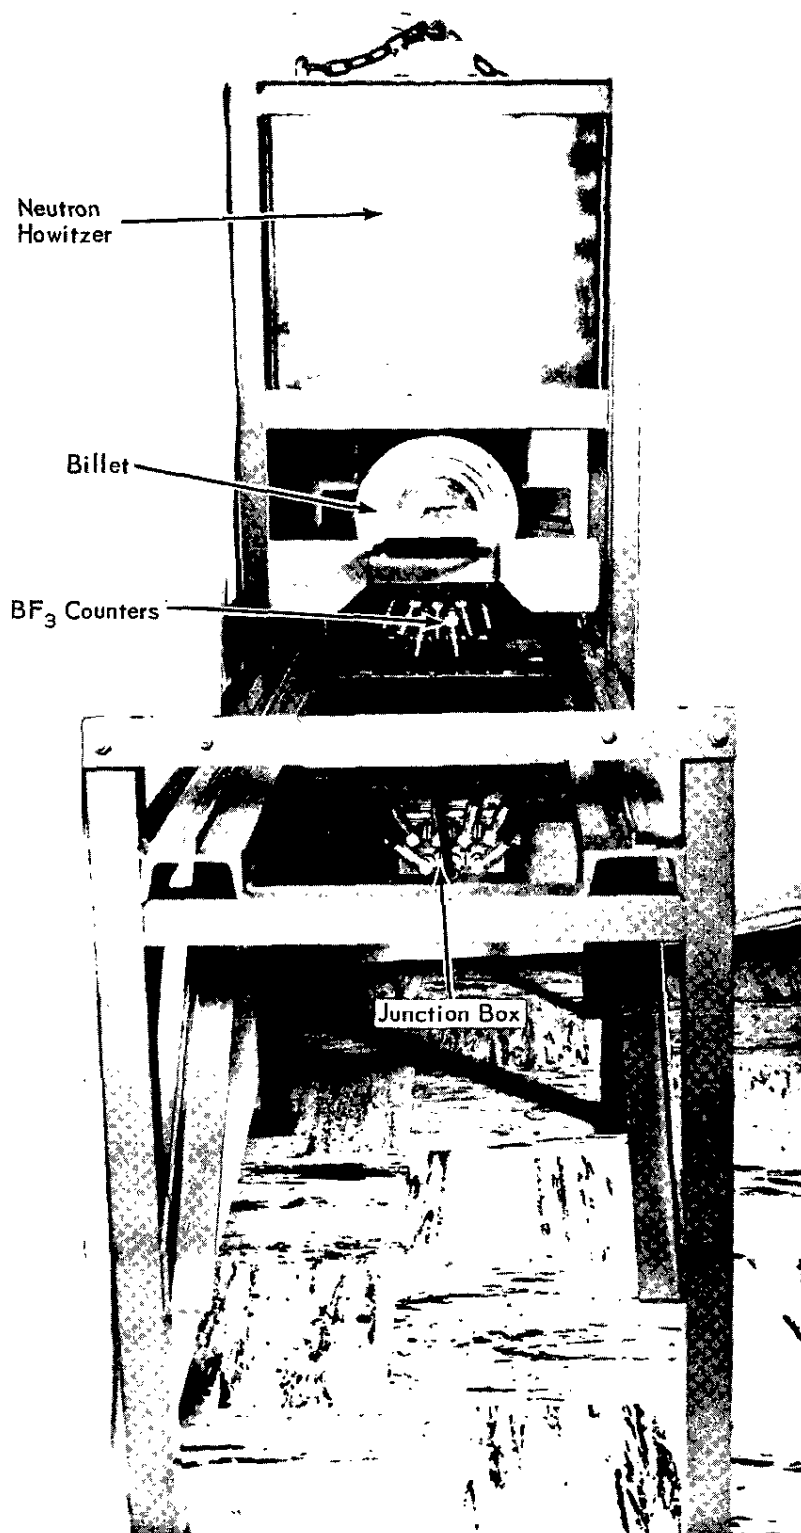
END VIEW OF ASSEMBLED BILLET TESTER
